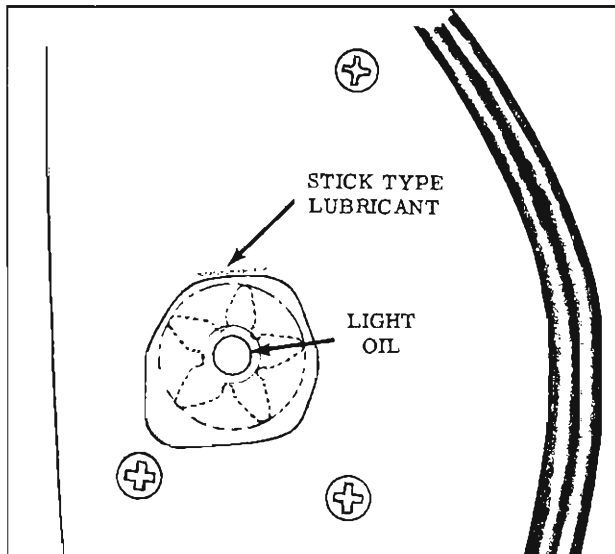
Door Rotary Bolt Lubrication (3300 through 3900 Series)
